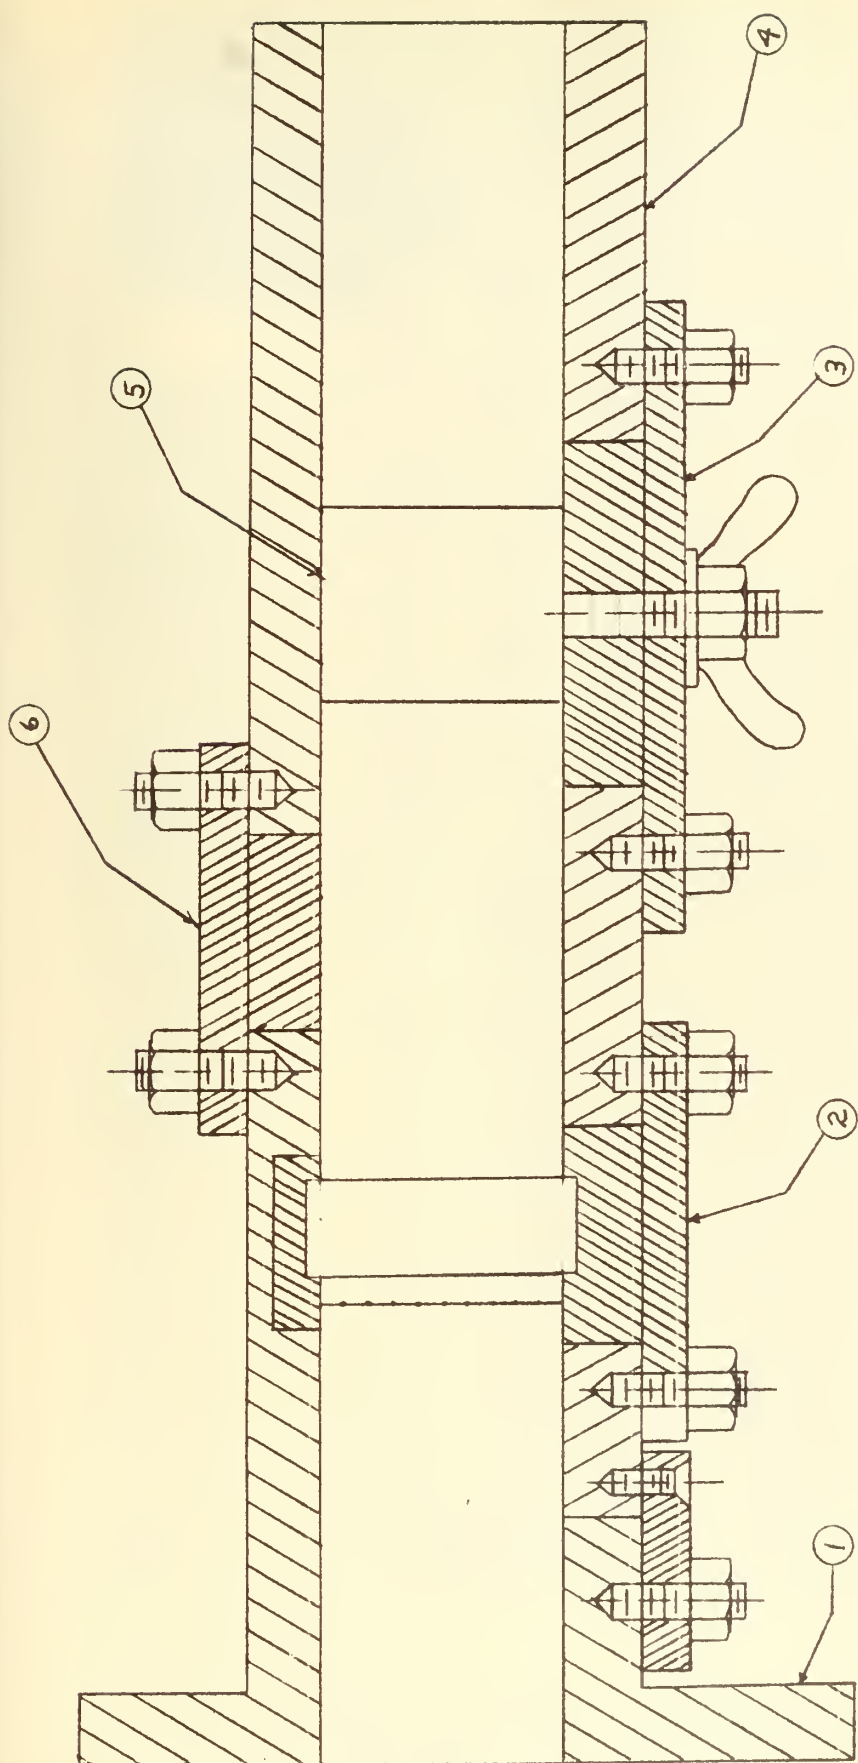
Full Size Horizontal Cross Section of Cascade Showing: 1- Tunnel Base; 2- Inlet Guide Vane Assembly; 3- Test Vane Assembly; 4- Cover; 5- Test Vane; 6- Pressure Tap Slider Assembly.
